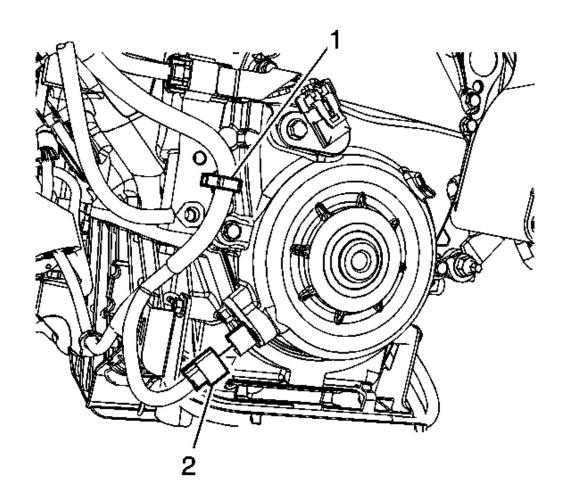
Crankshaft Position (CKP) Sensor Electrical Connector & Clip Courtesy of GENERAL MOTORS CORP.
